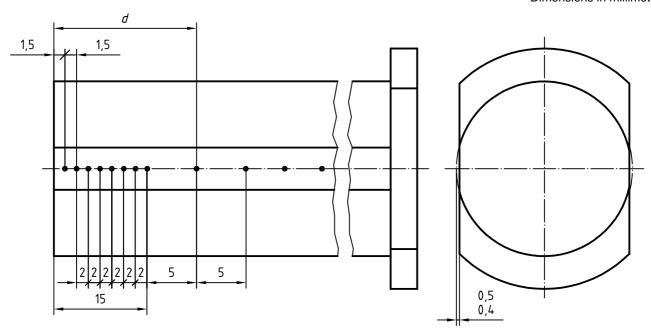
Preparation of test piece for measurement of hardness, and position of hardness measurement points
